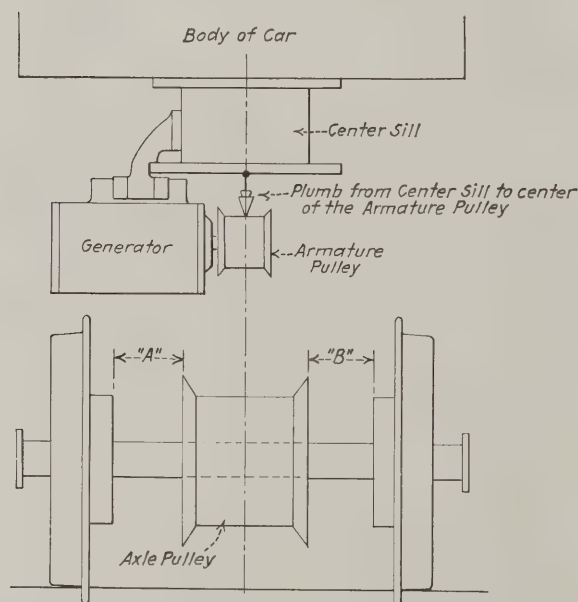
Lining Up Axle Pulley on a Body Type Generator
